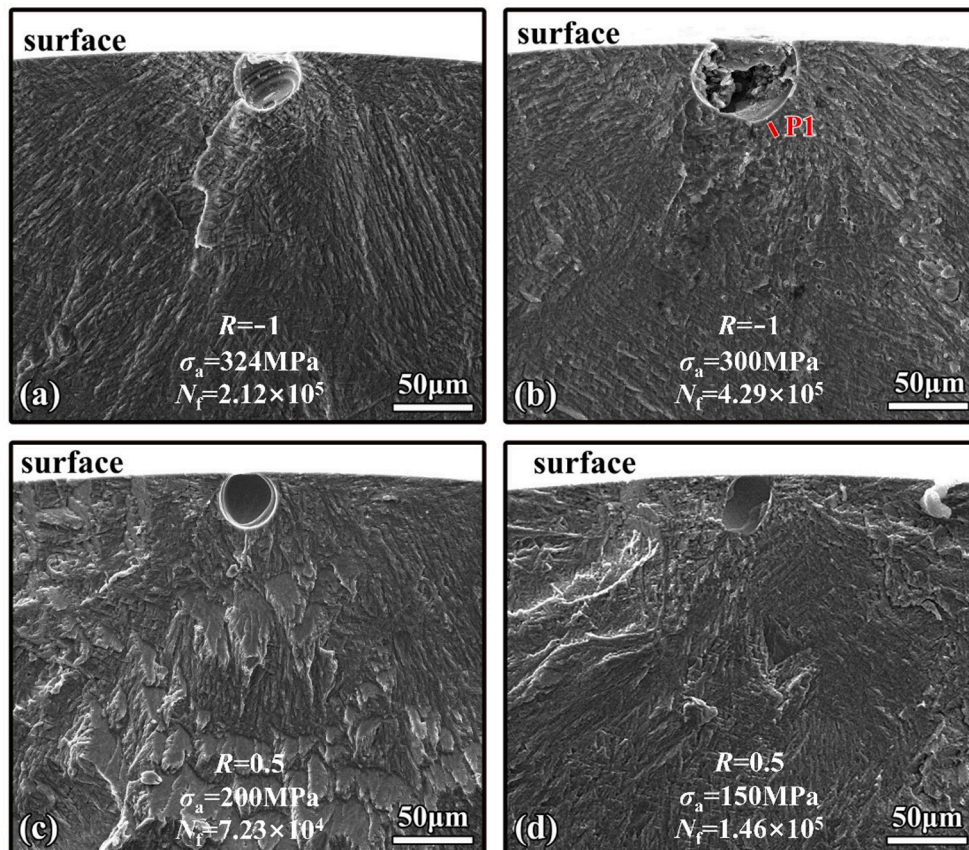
Typical fracture surface morphologies of crack initiation from surface defects of specimens failed in LCF and HCF regimes, P1 in (b) being the location of TEM sample cut by FIB.
